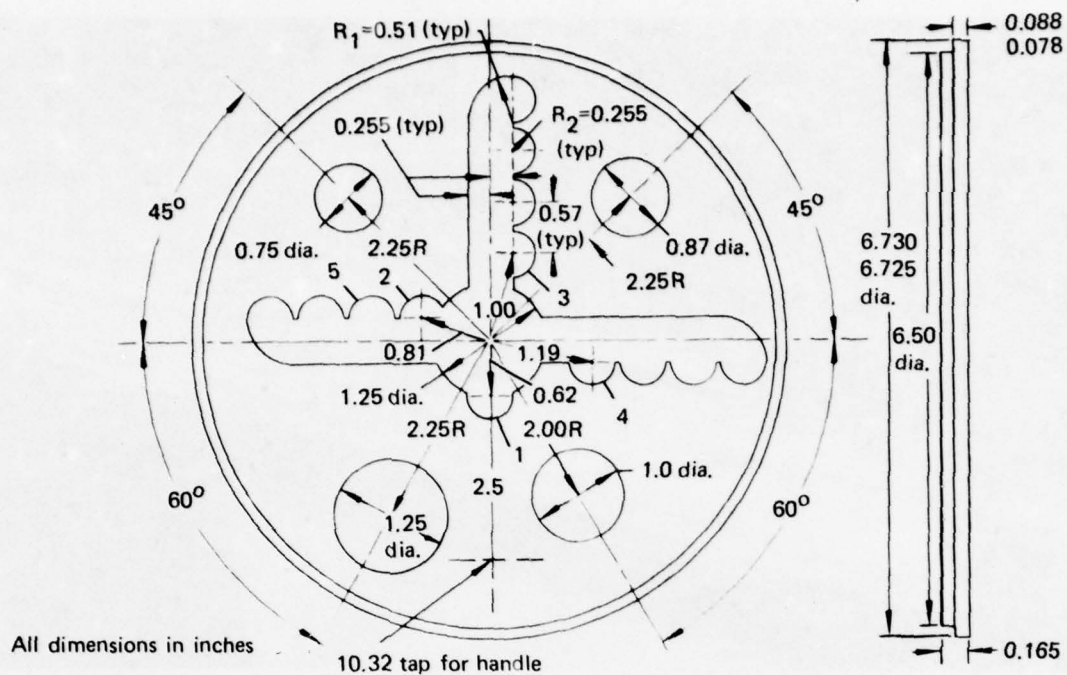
Router Template Assembly Component—Rotating Plate
